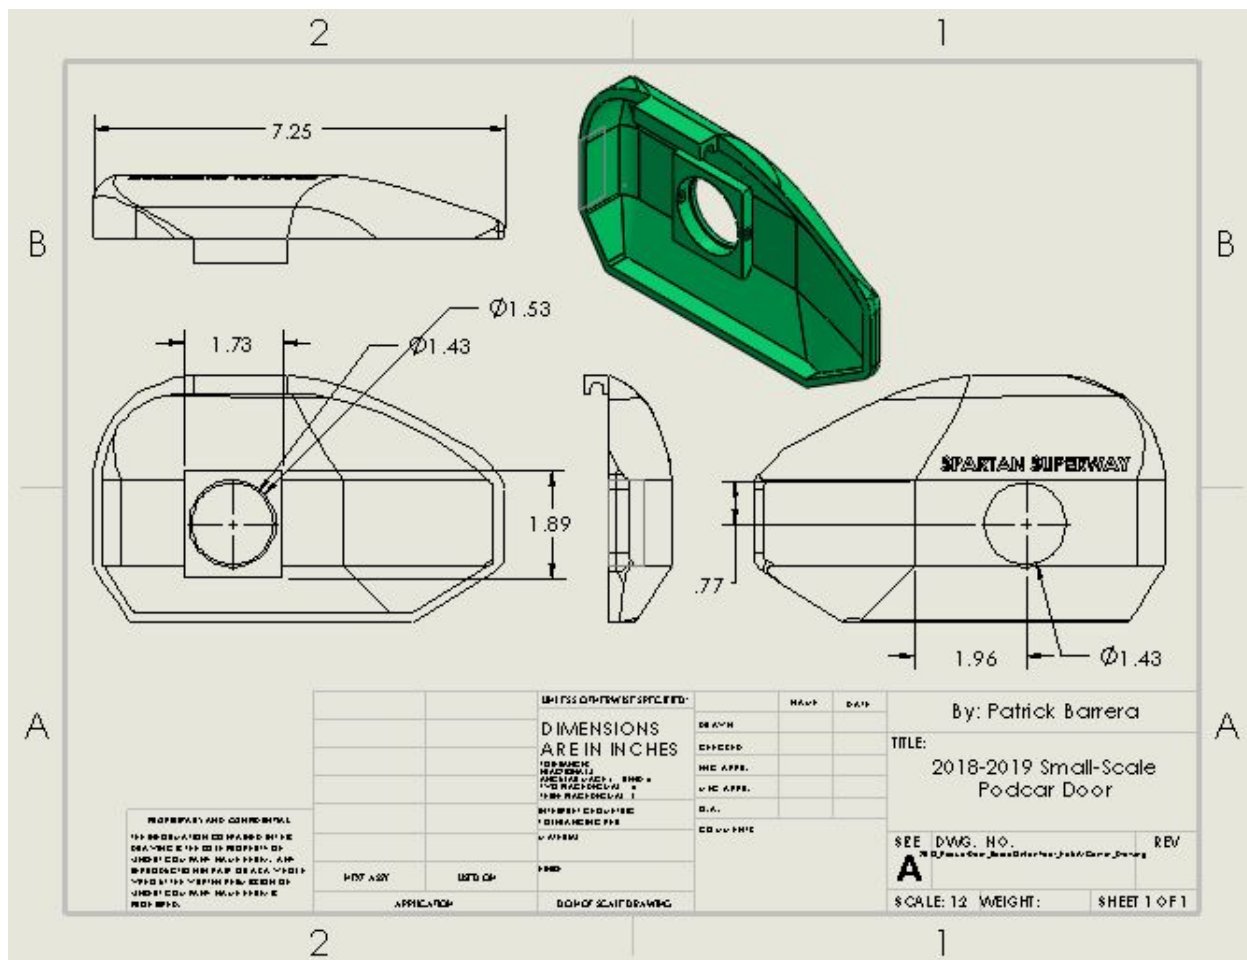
SolidWorks 2D-detail drawing of new pod car door
